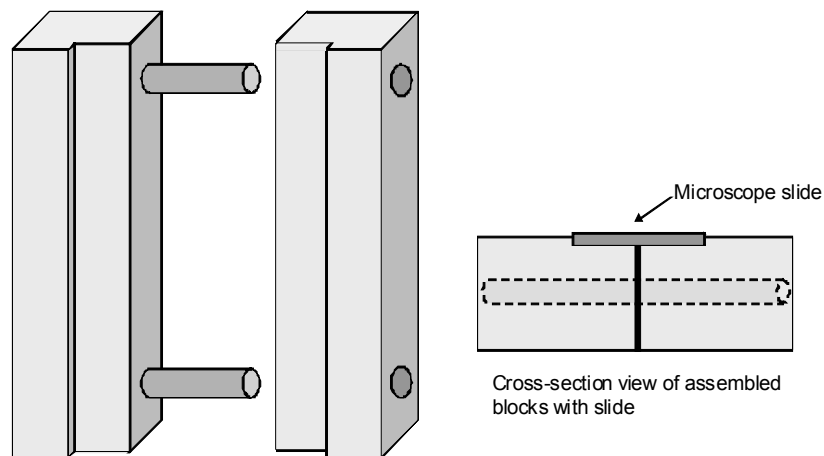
Slide holder made from hard plastic blocks and stainless steel pins. The pins embedded in the left block fit smoothly into holes in the right block to hold a microscope slide tightly in the depressed portion of the two blocks. The depression is slightly shallower than the thickness of a microscope slide, and the length of the blocks is equal to that of a microscope slide.
